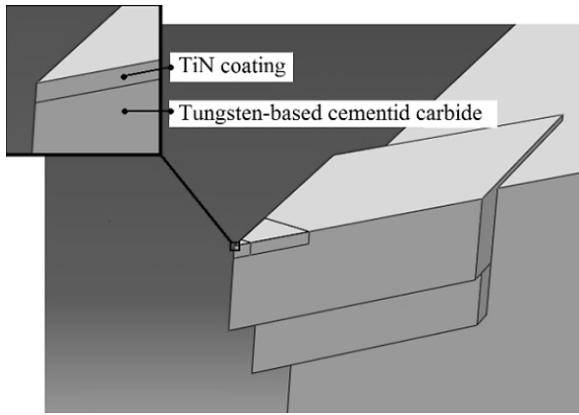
CAD model for TiN-coated (3 μm) cutting tool
